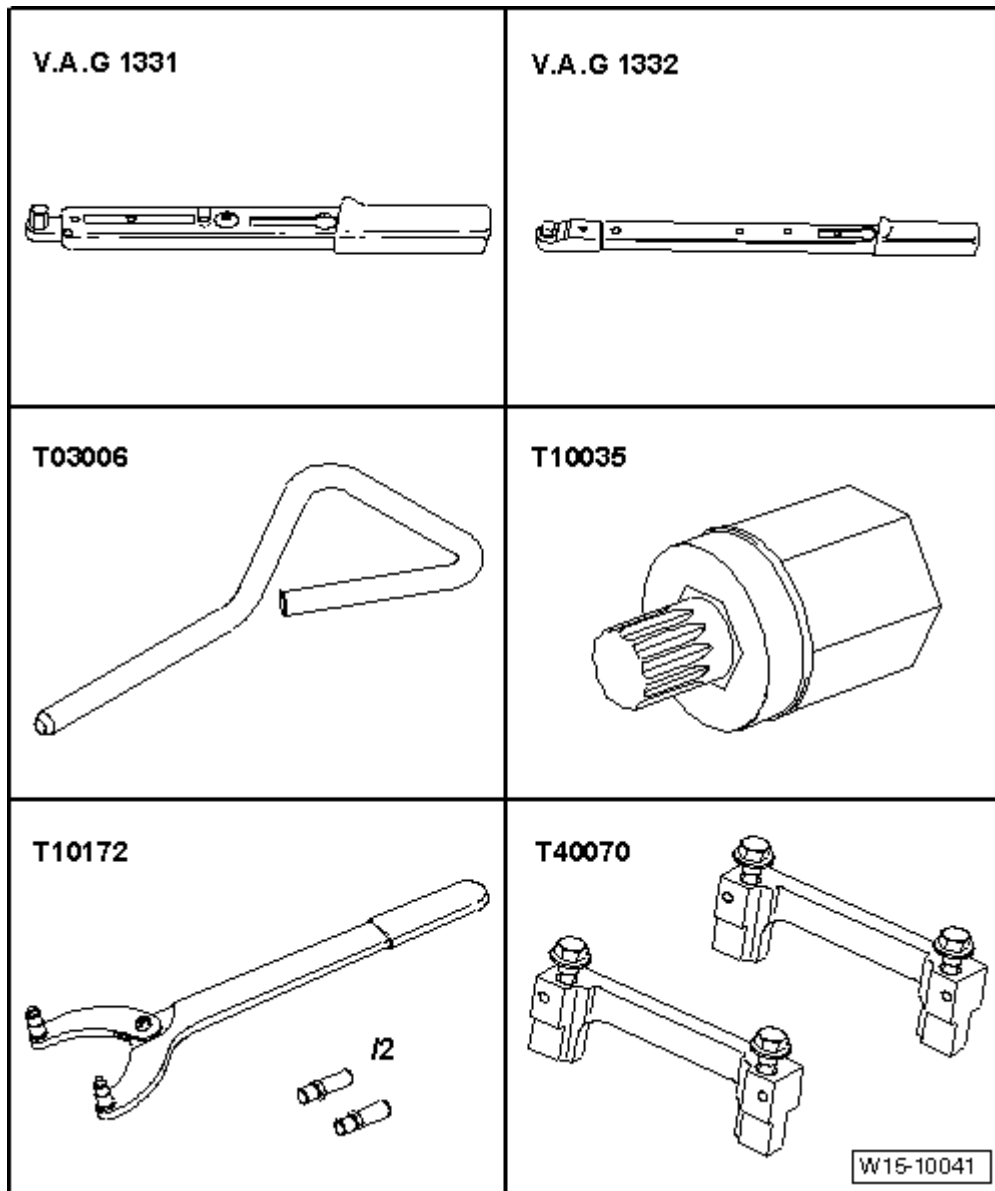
Identifying Special Tools -- Valve Timing, Adjusting
